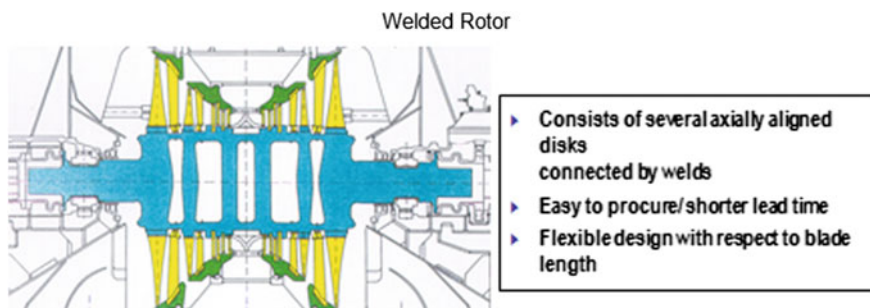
Welded Rotor (courtesy of Siemens)
